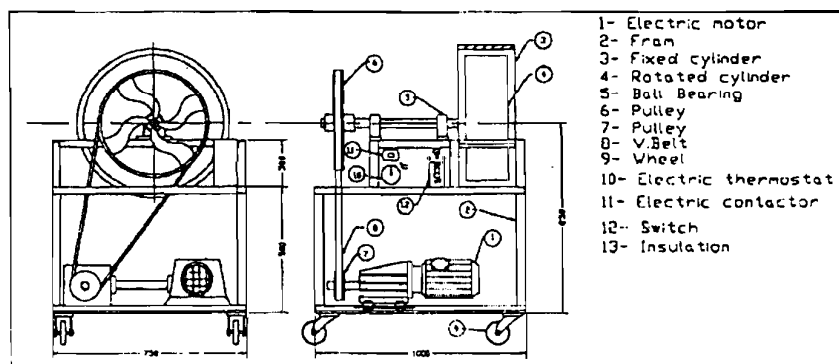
Elevation and side view of the experimental conduction-heating unit.
